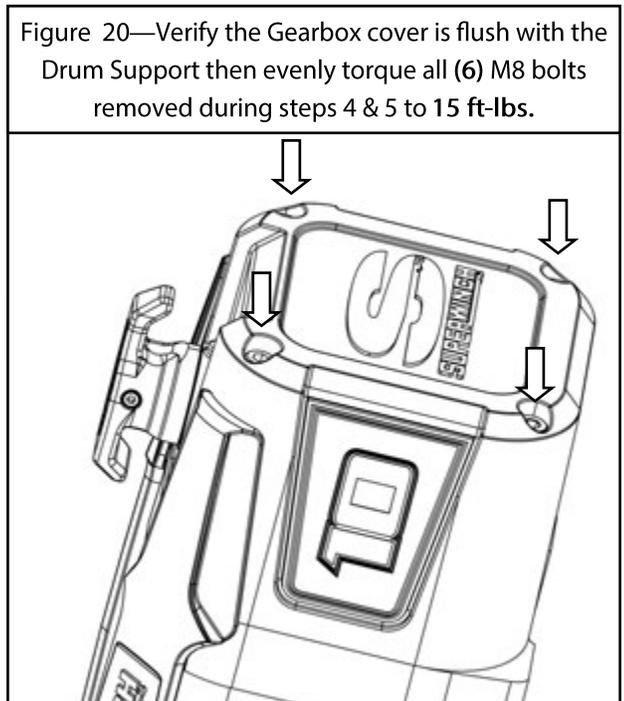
Verify the Gearbox cover is flush with the Drum Support then evenly torque all (6) M8 bolts removed during steps 4 & 5 to 15 ft-lbs.
